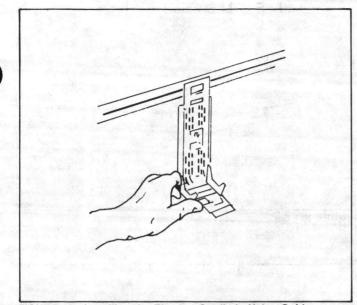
Installing the Element Cradle in Nylon Guides
